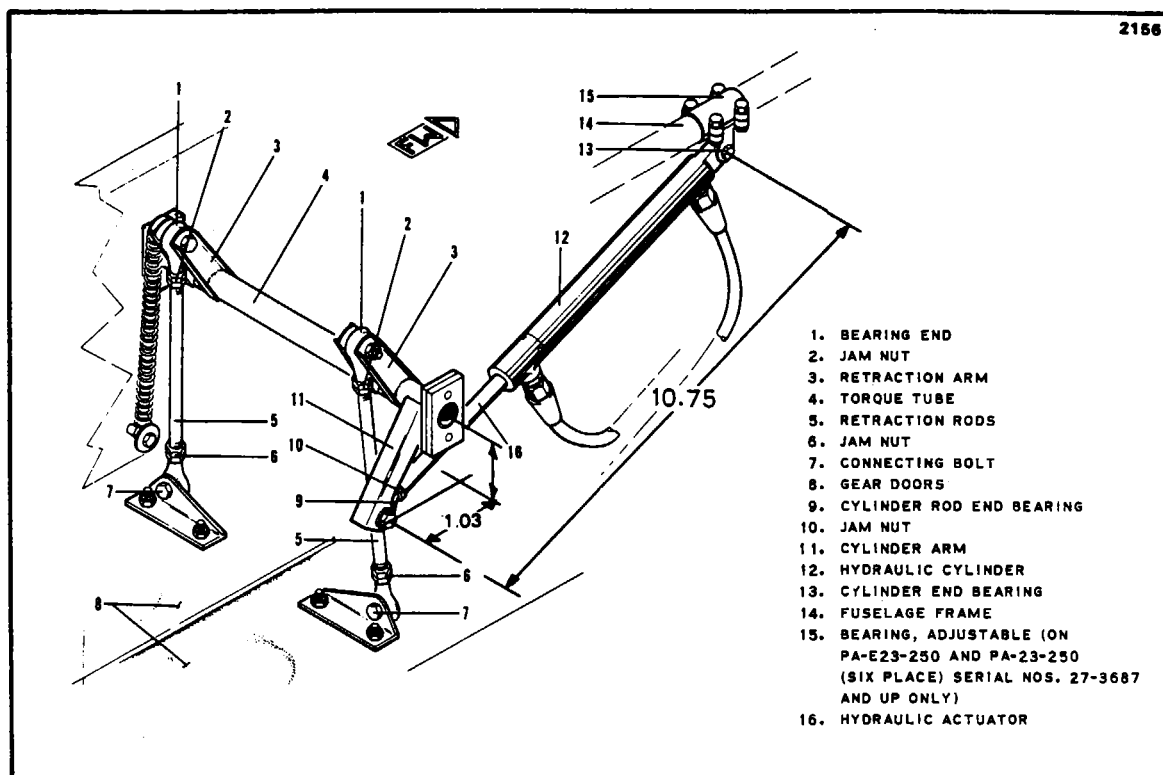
Hydraulic Nose Gear Door Mechanism
